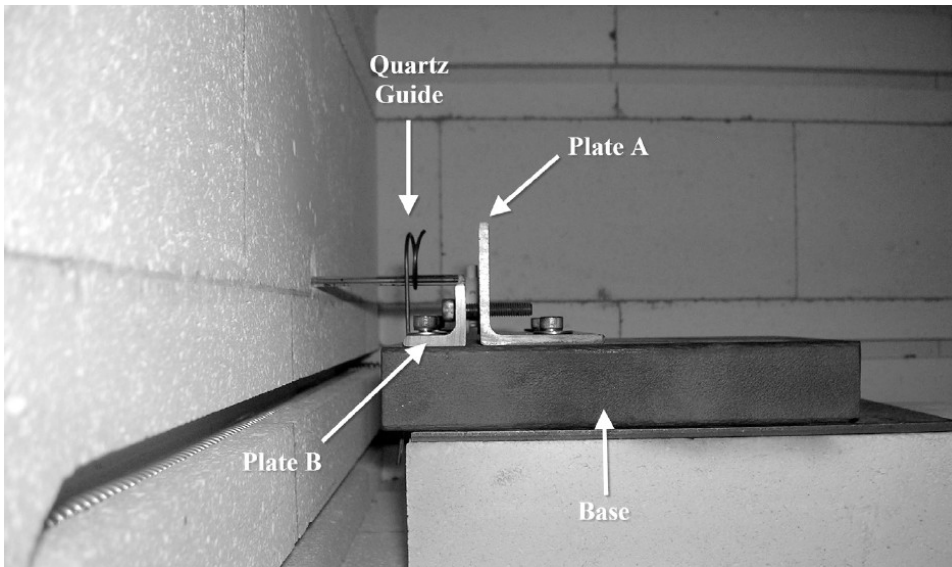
Kiln Interior – Quartz Guide and Holding Fixture
